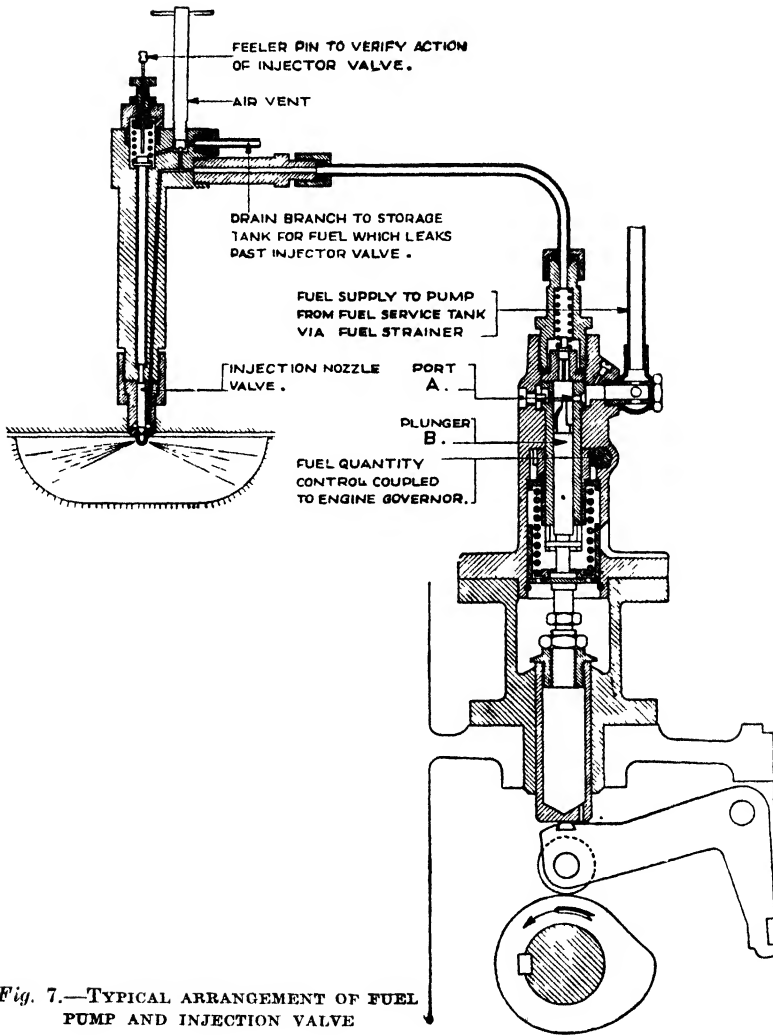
TYPICAL ARRANGEMENT OF FUEL PUMP AND INJECTION VALVE
